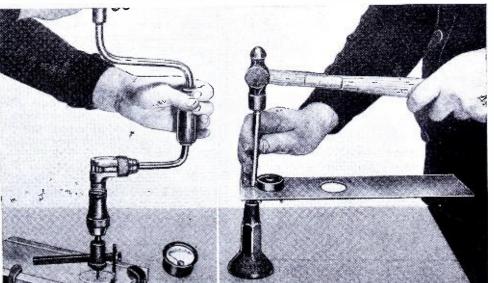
(above) 1%-inch socket holes being cut in  $\frac{1}{16}''$  steel chassis. Holes are perfectly round and without burrs. The punch should be placed over a leg of the table for solid support.
